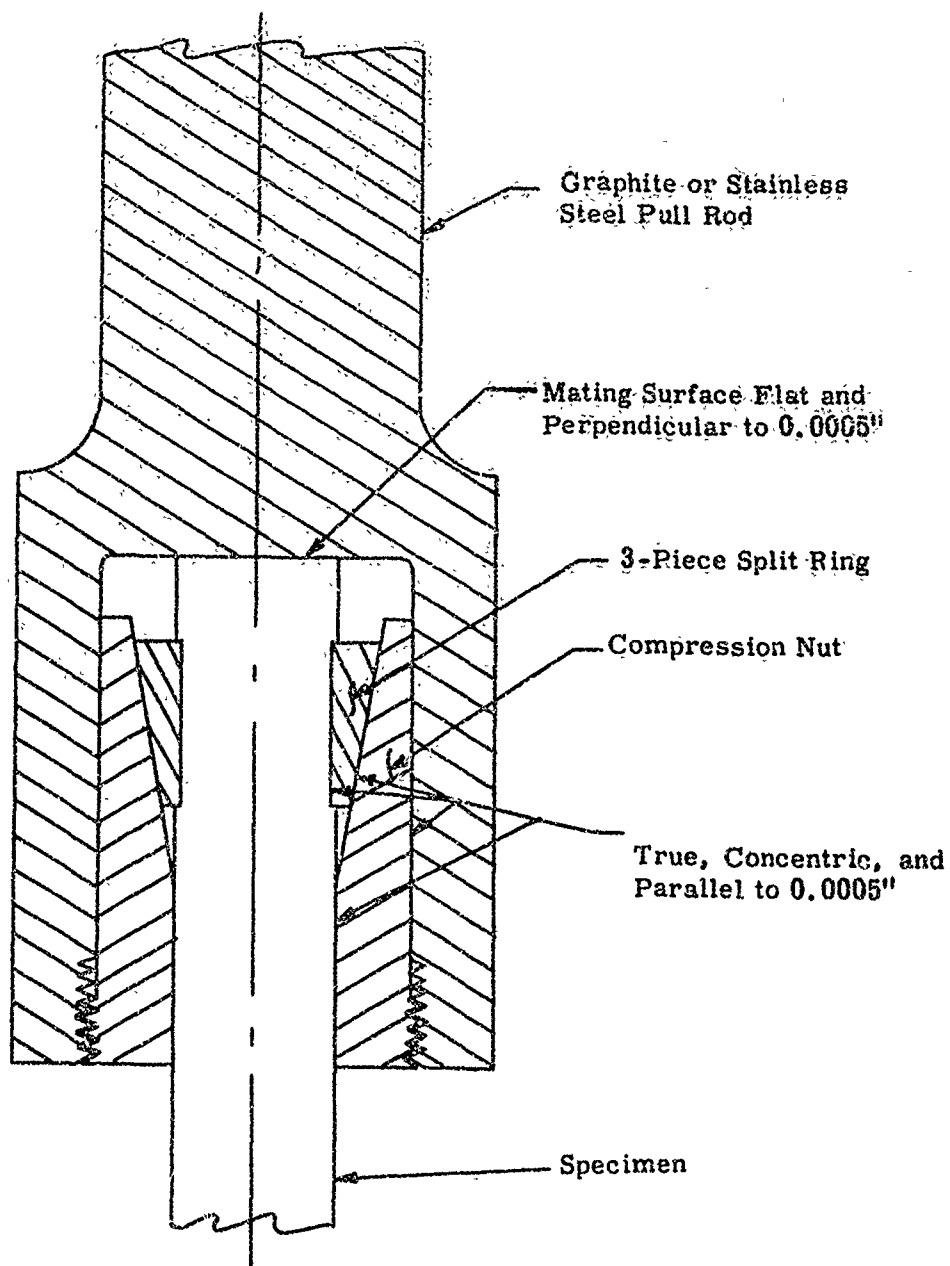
Precision Collet Grip for Tensile Specimens 2:1 Scale
